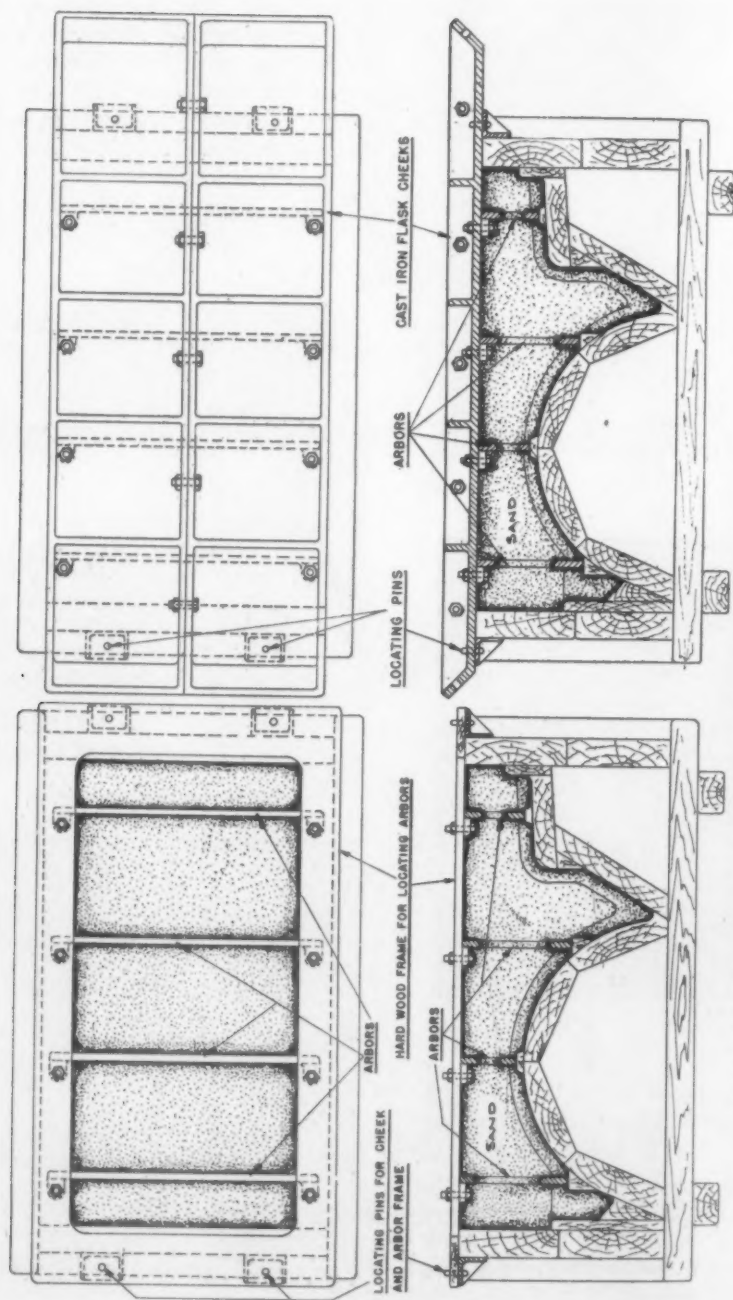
LEFT—CROSS SECTION OF SIDE CHEEK CORE SHOWING ARBOR LOCATIONS AND METHOD OF LOCATING THEM.
